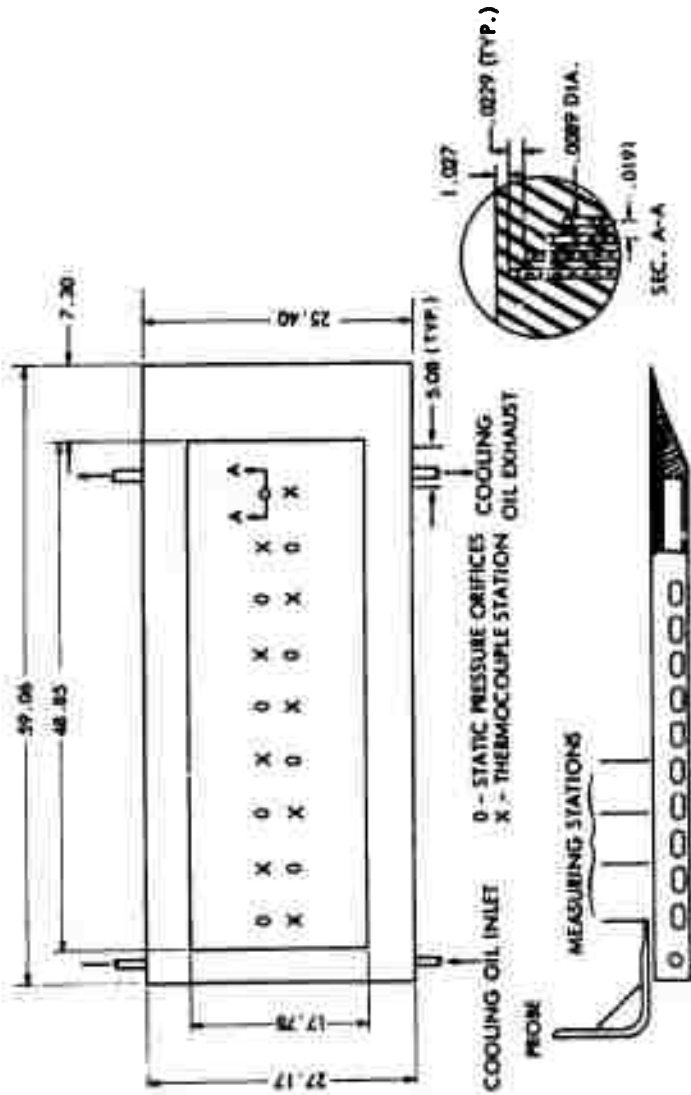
SKETCH OF MODEL ( ALL DIMENSIONS IN CM )
